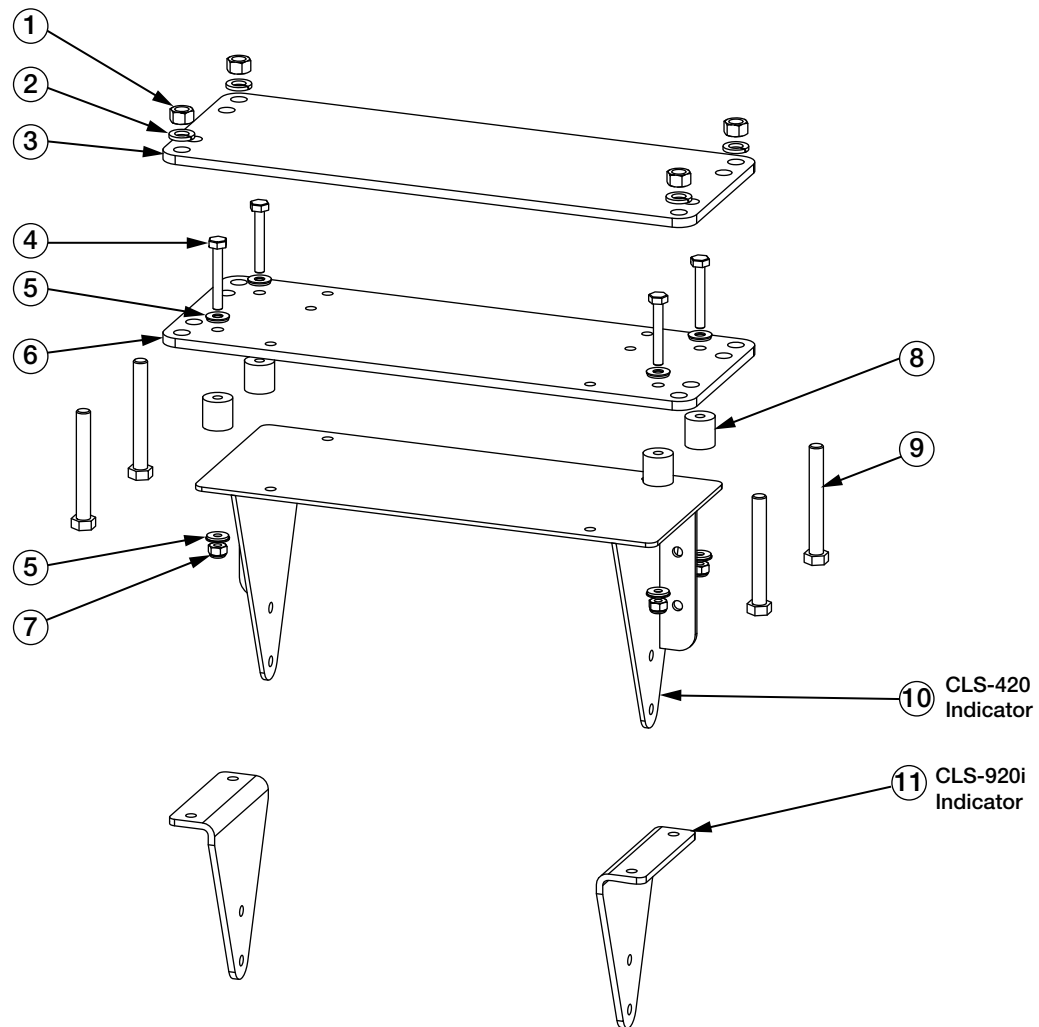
Indicator Mounting Bracket Parts Illustration
